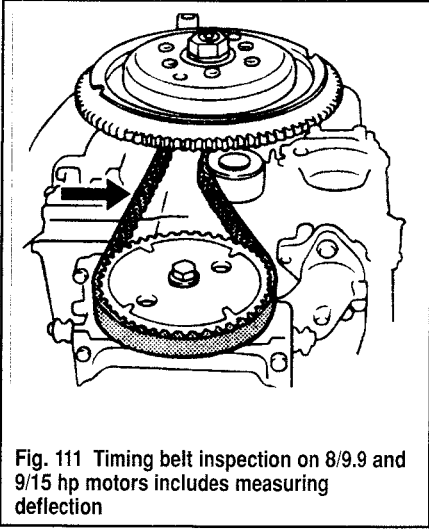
Timing belt inspection on 8/9.9 and 9/15 hp motors includes measuring deflection
